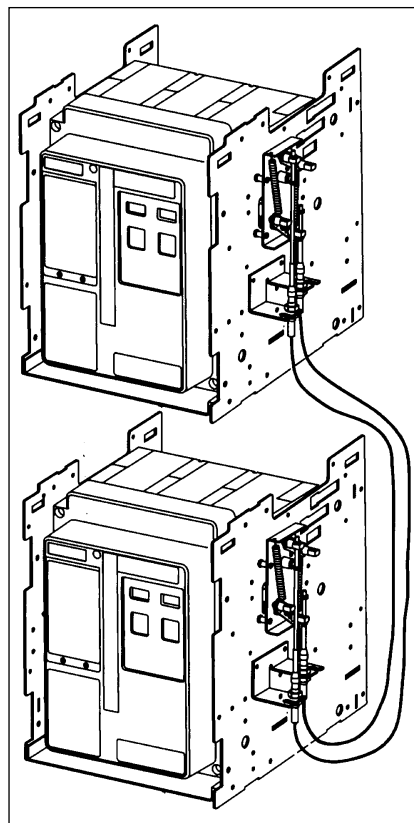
Cassette-Mounted 2-Way Cable Interlock
